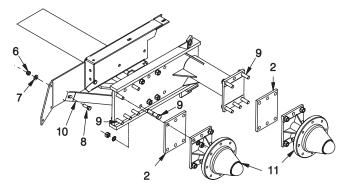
Mounting Spacer Plate, Hub & Spindles
